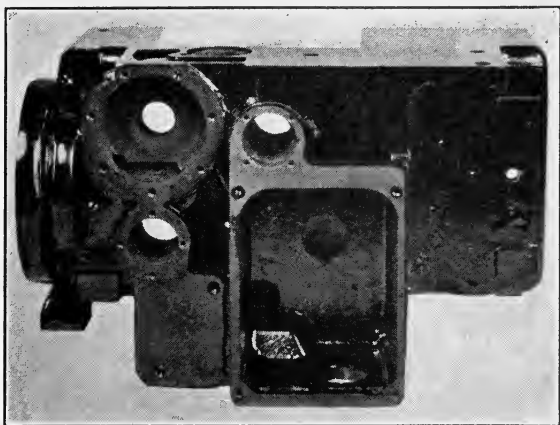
Rear view of the main case, housing the transformer assembly and the drive gears.
